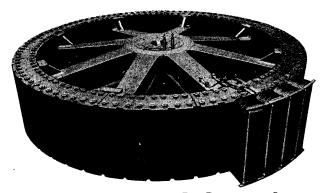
View of Laminated Rim Rotor with Some Poles and Coils in Position
